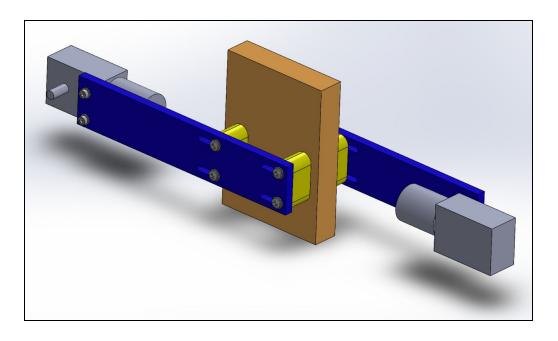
SolidWorks model of the worm gear motor mounts for the acrylic weather sheets, shown from the front side. The acrylic mounts are in blue, and the 3D printed spacers are in yellow. The small gears would be attached to the shafts on the worm gear motors.
